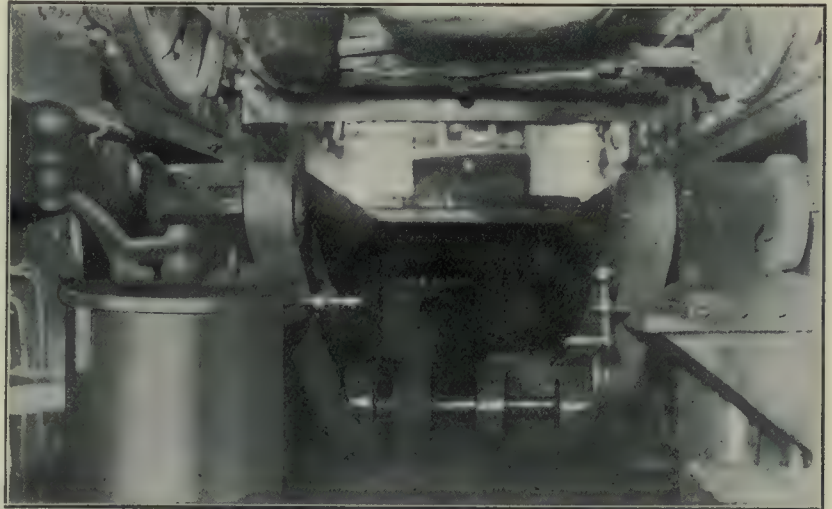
Arrangement for Grinding Flats from Wheels.
